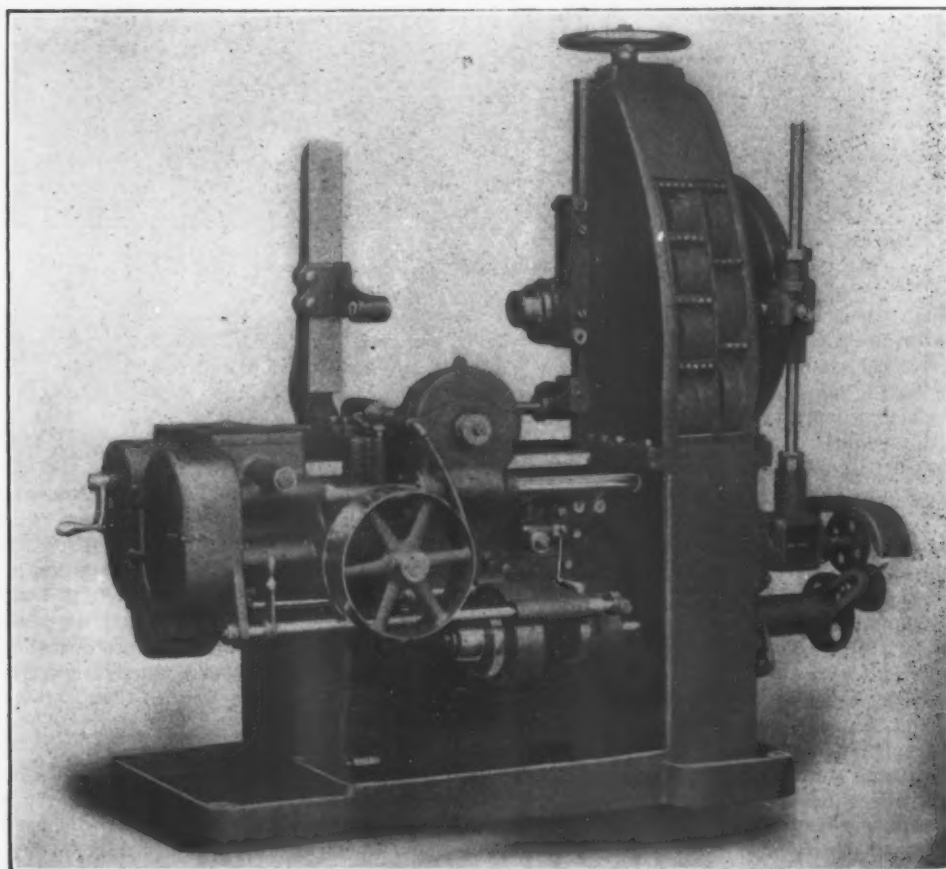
A Rear View of the New Cincinnati Gear Cutter.
